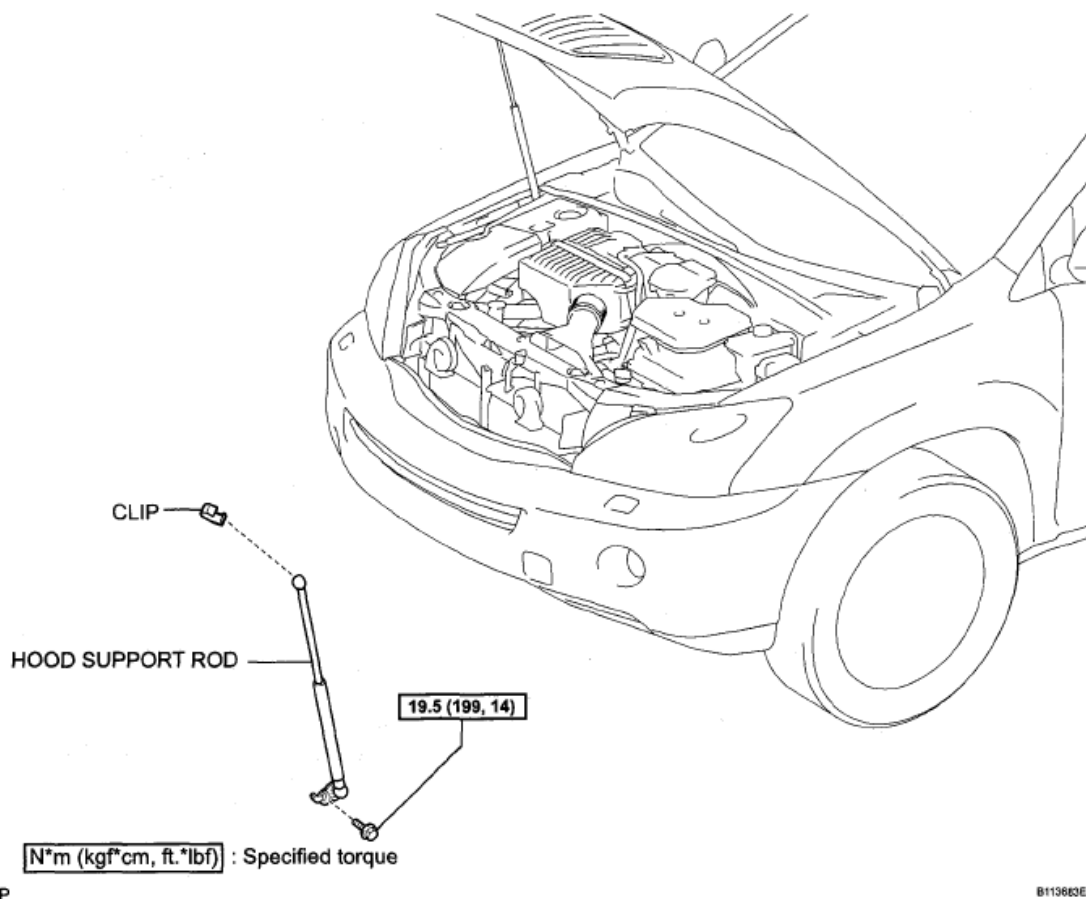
Identifying Hood Support Rod Components With Torque Specification
